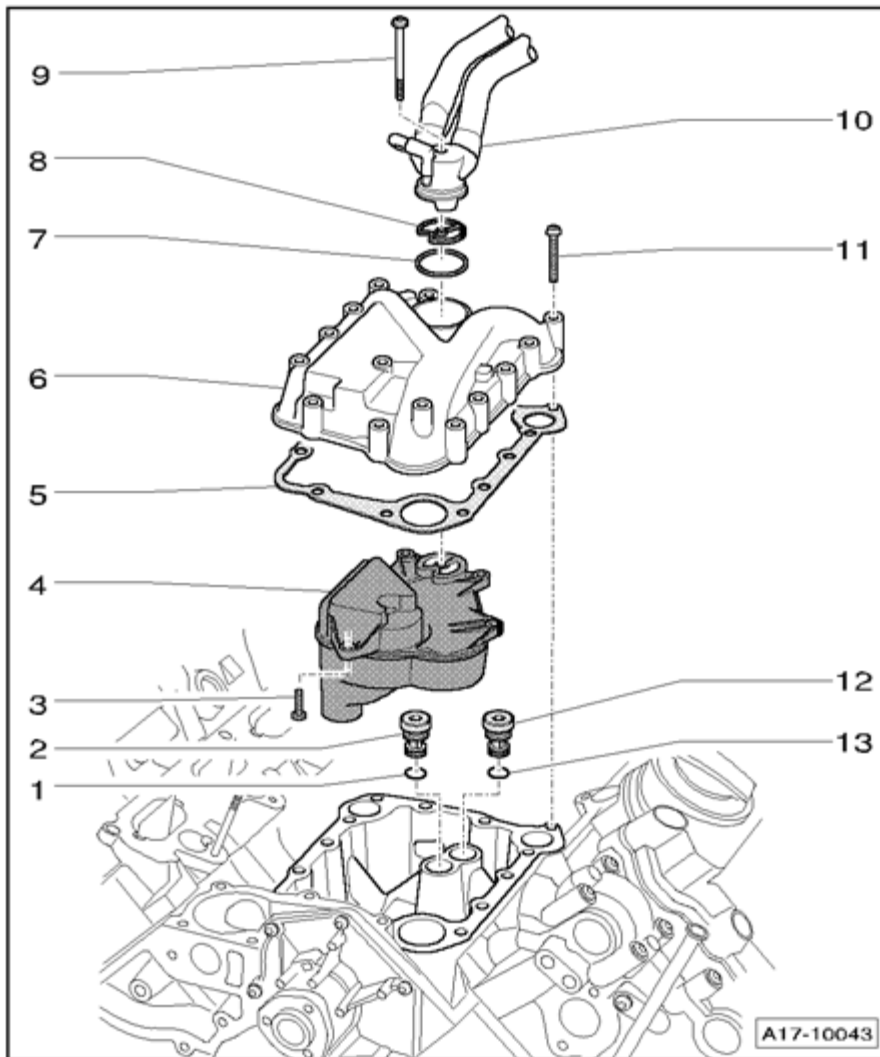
Oil Check Valves, Oil Separator, Component Overview
